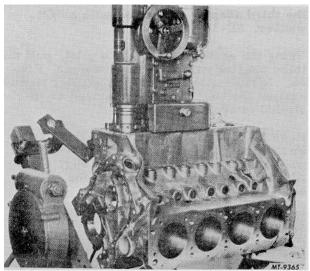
Reboring Cylinder Using SE-1399 Boring Machine
